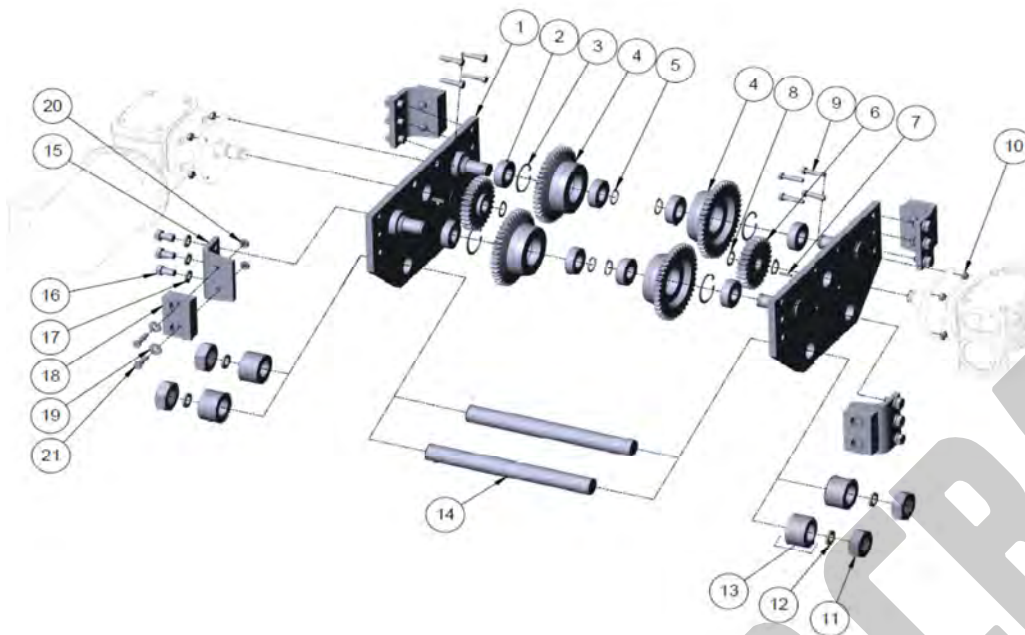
Trolley Frame and Wheel Assembly Two Motor 4"0 Wheels
